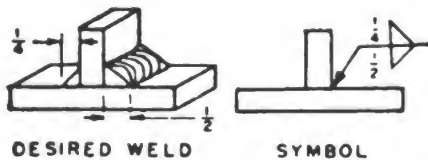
Size of unequal double-fillet weld.
